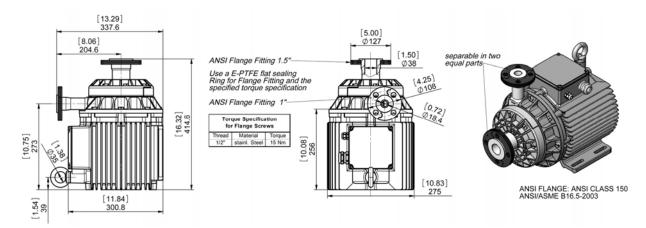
Basic dimensions (in mm and [inch]) of LPM-4000.2 motor with LPP-4000.1 pump head (for other configurations refer to according drawings)
